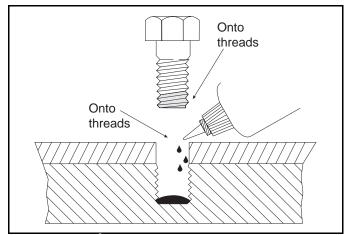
(MSSM0101CE) Applying Threadlocker to Blind Holes
